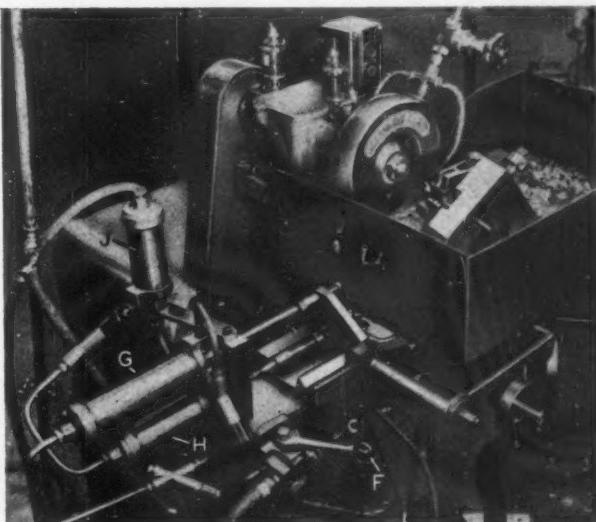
For Cutting Off the End of the Aerofoil Portion to the Required Length, this Beacon Machine Tools Surface Grinder, Fitted with an Air-hydraulic Feed System, is Employed
